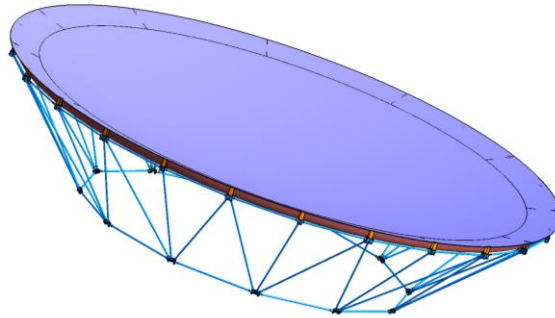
Conical ring supported shell-membrane reflector demonstrator design
